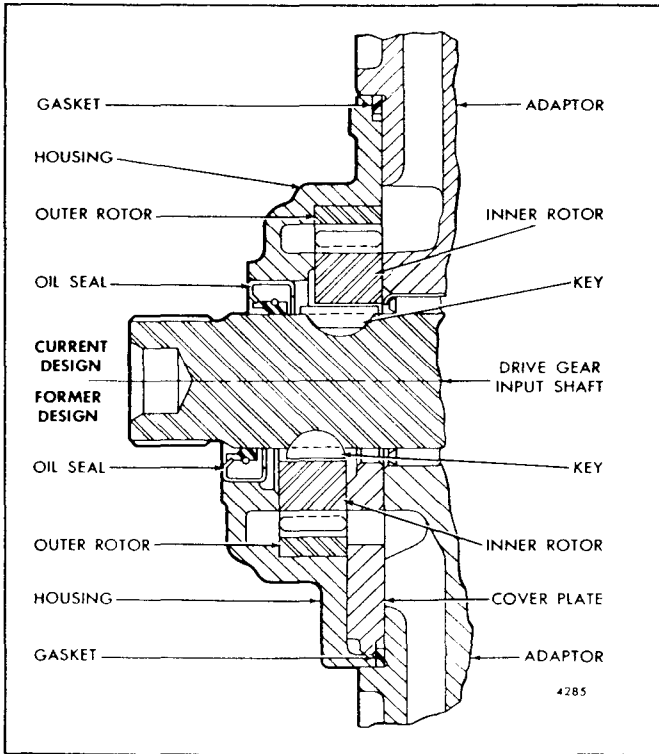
Current and Former Marine Gear Oil Pump Assemblies
